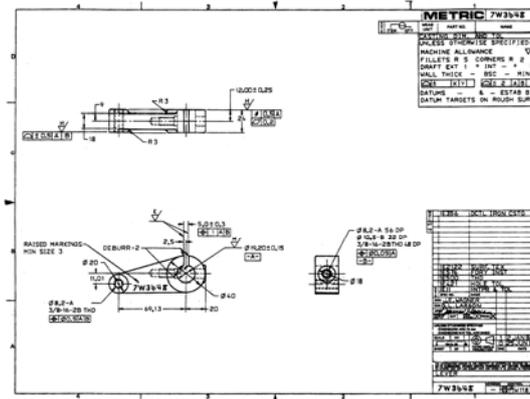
A technical drawing showing orthographic views, dimensions, tolerances, finishing, part number and material type (Bertoline 2002)
